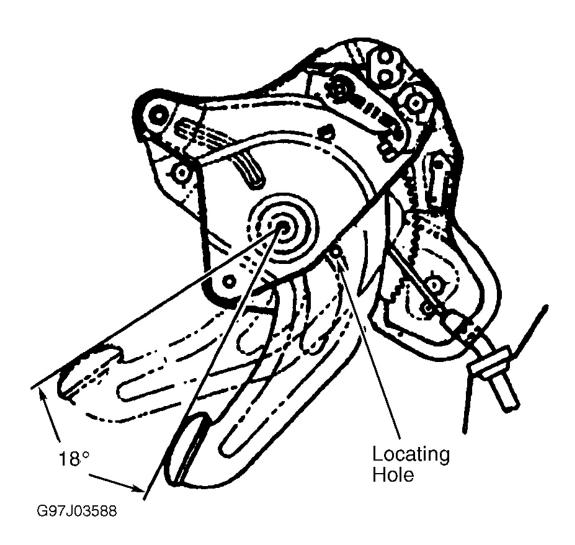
Identifying Brake Adjustment Locating Hole (C/K Series) Courtesy of GENERAL MOTORS CORP.
